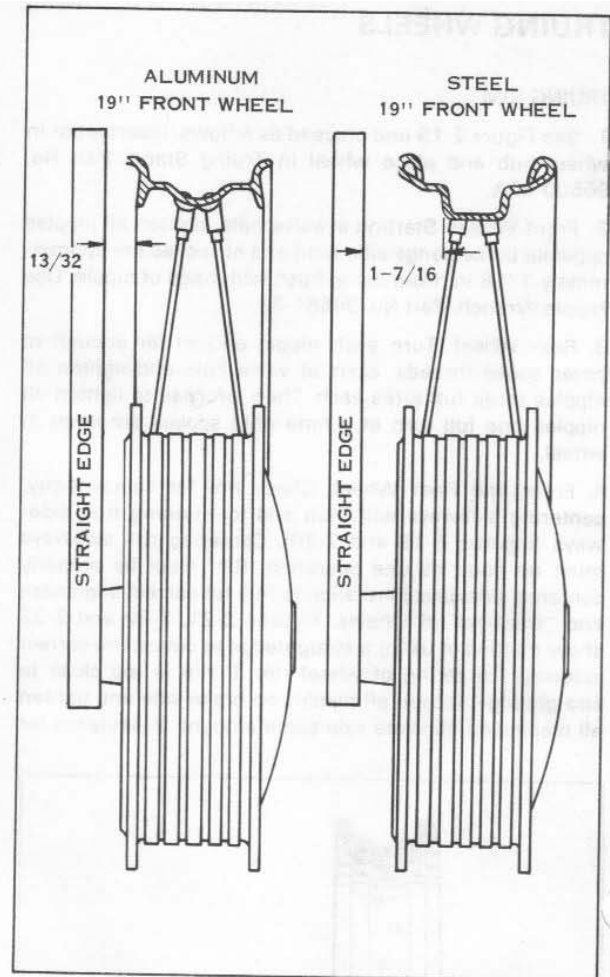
Aligning Front Wheel with Straightedge (1972 and Earlier)
